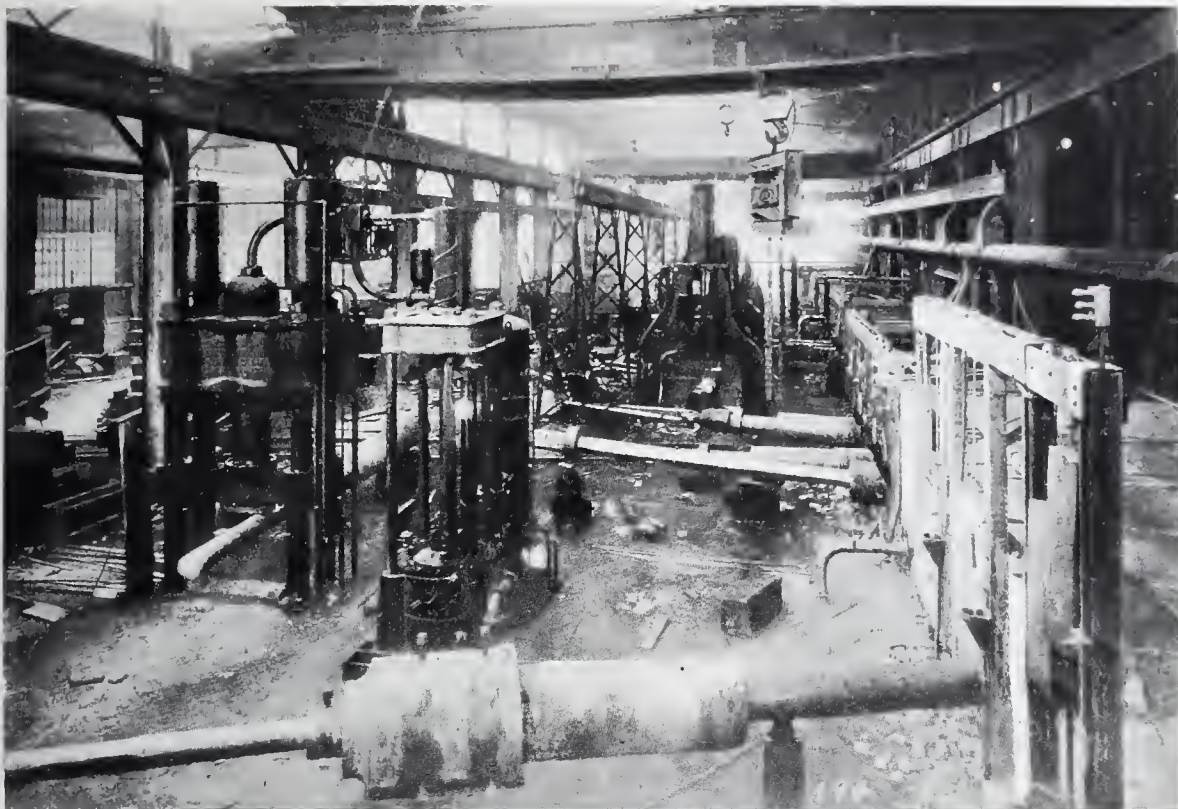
HEAVY FORGE FURNACES AT THE SIZER FORGE CO.'S WORKS.
